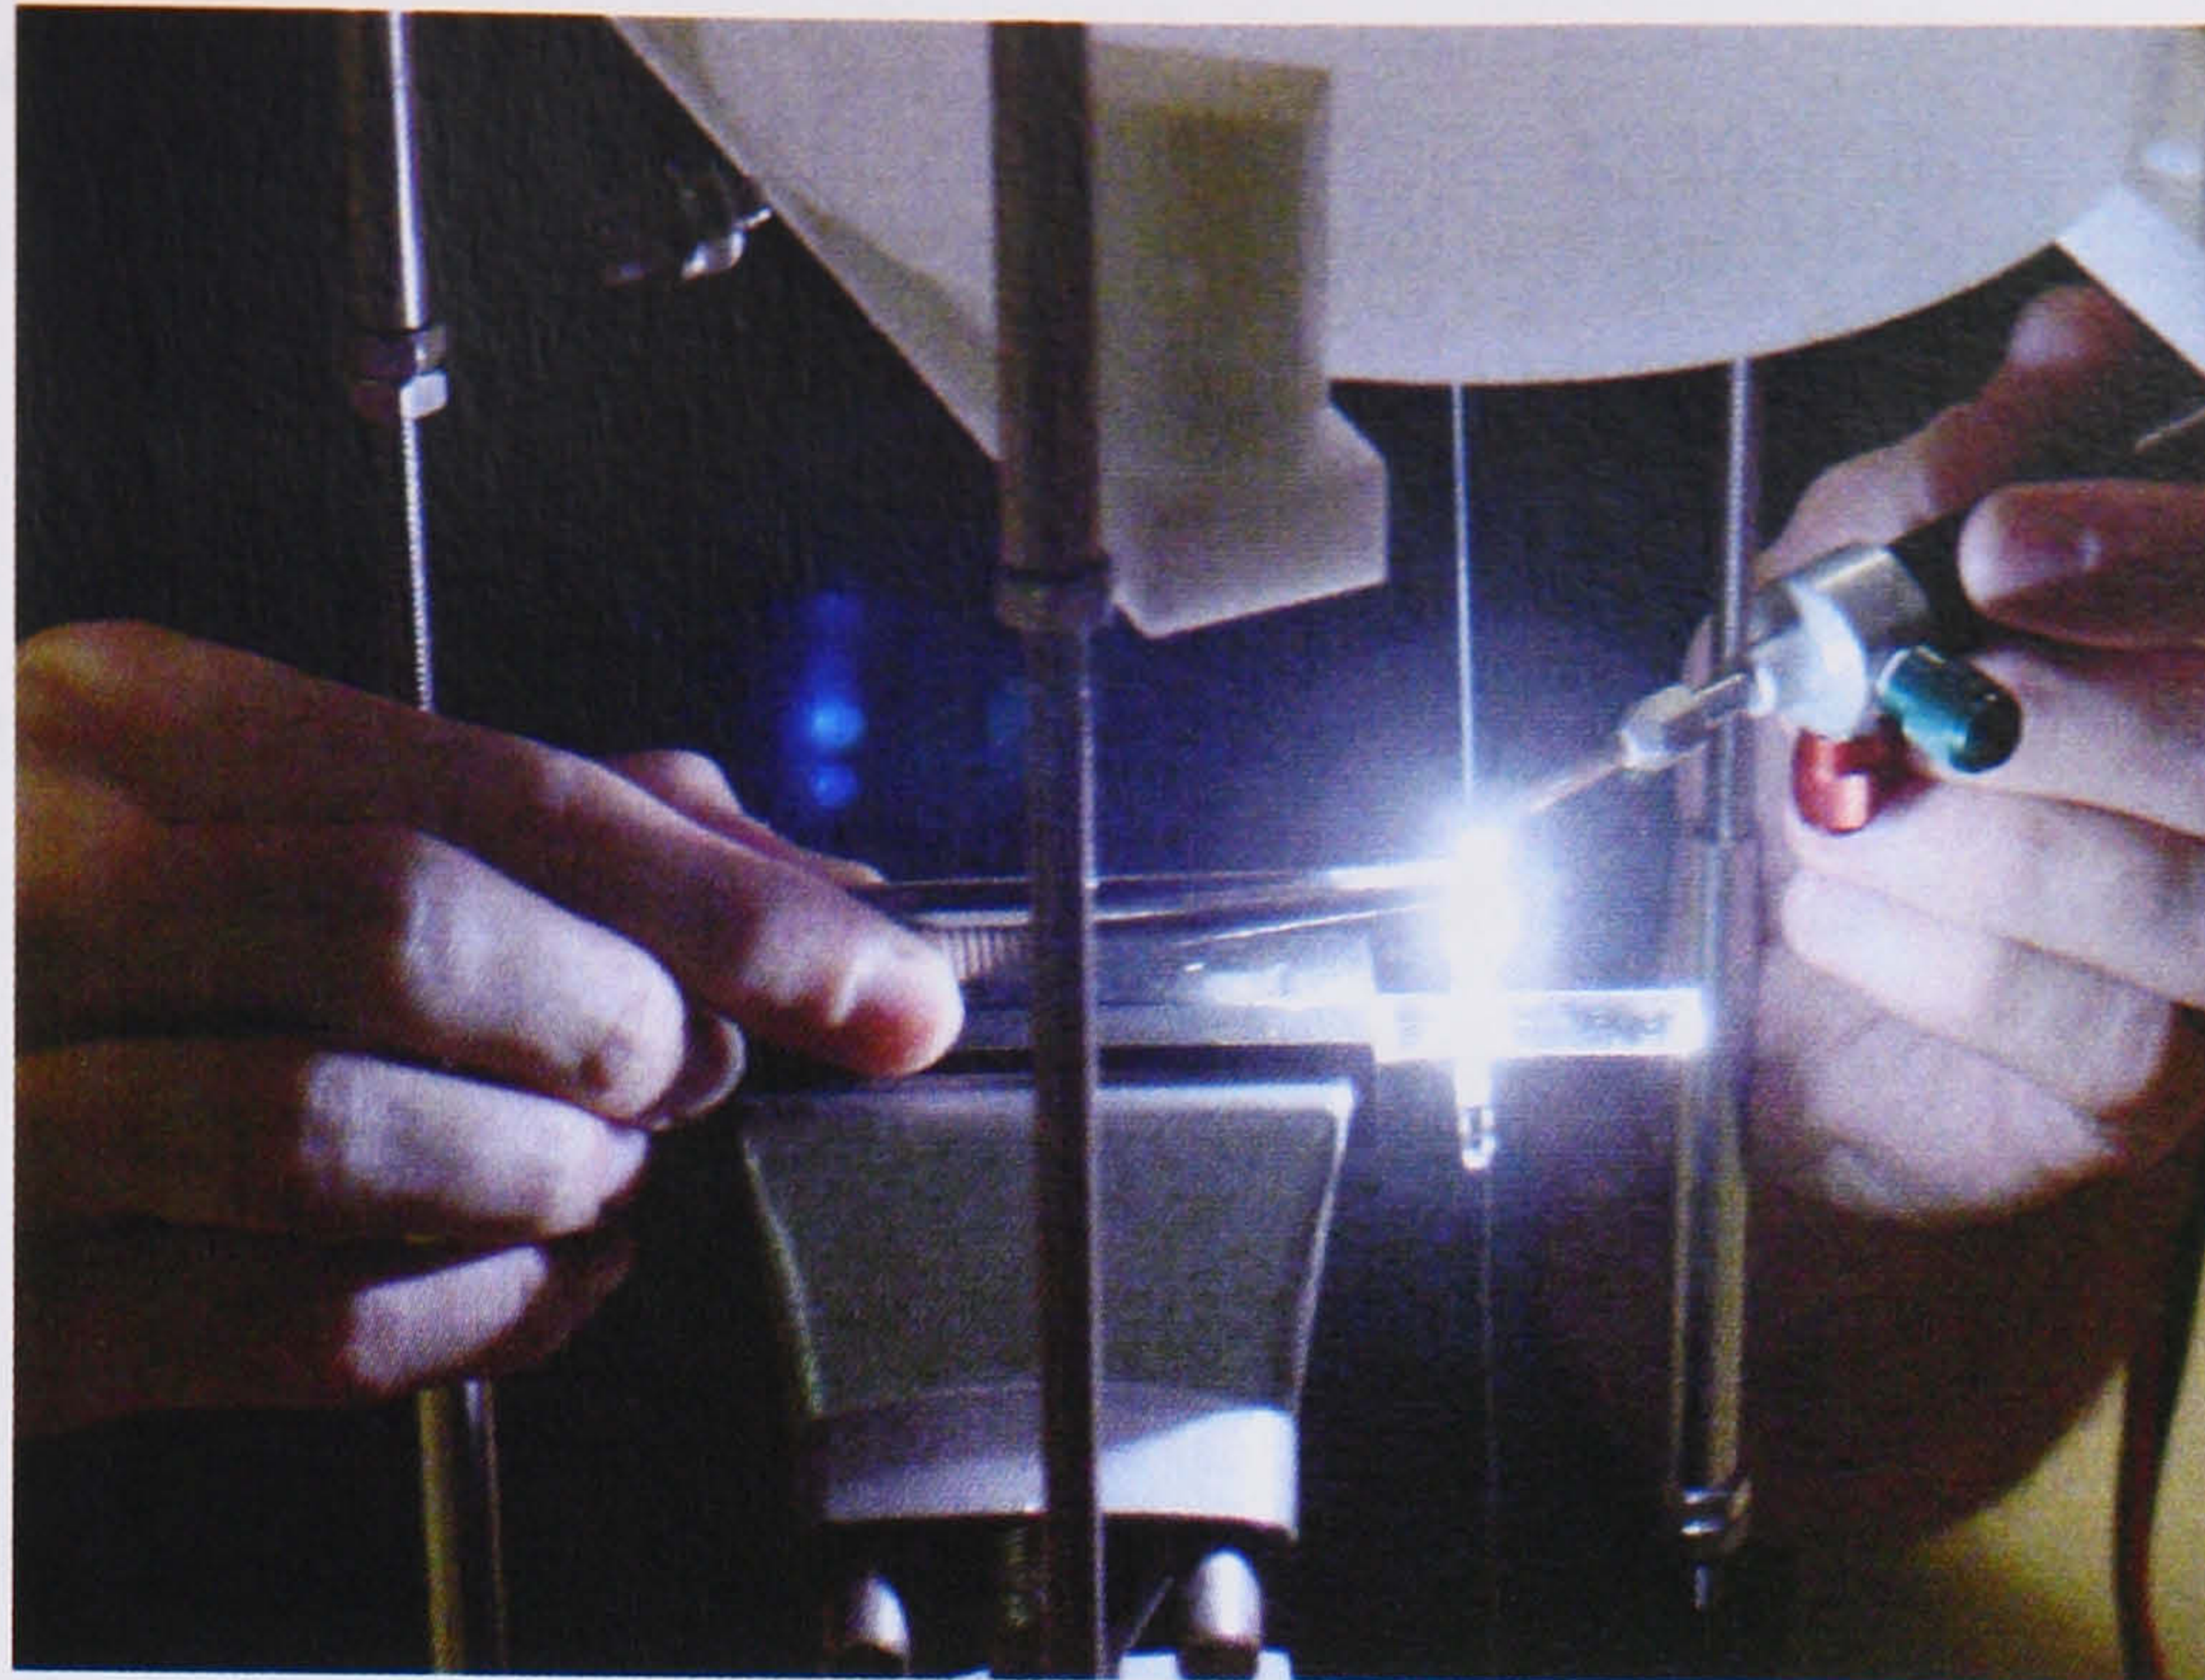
Welding the cruciform onto the suspension fibre using a hydrogen-oxygen gas torch.
